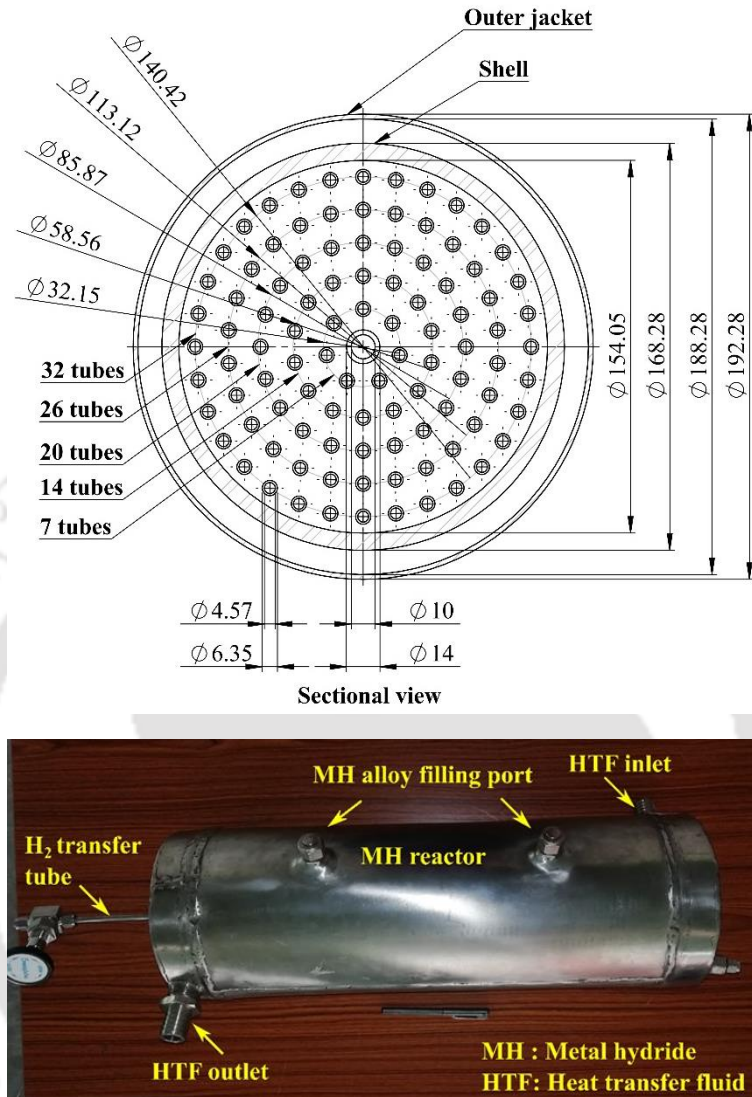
(a) 99 ECTR-OCJ model sectional view and (b) photograph of the fabricated unit.
